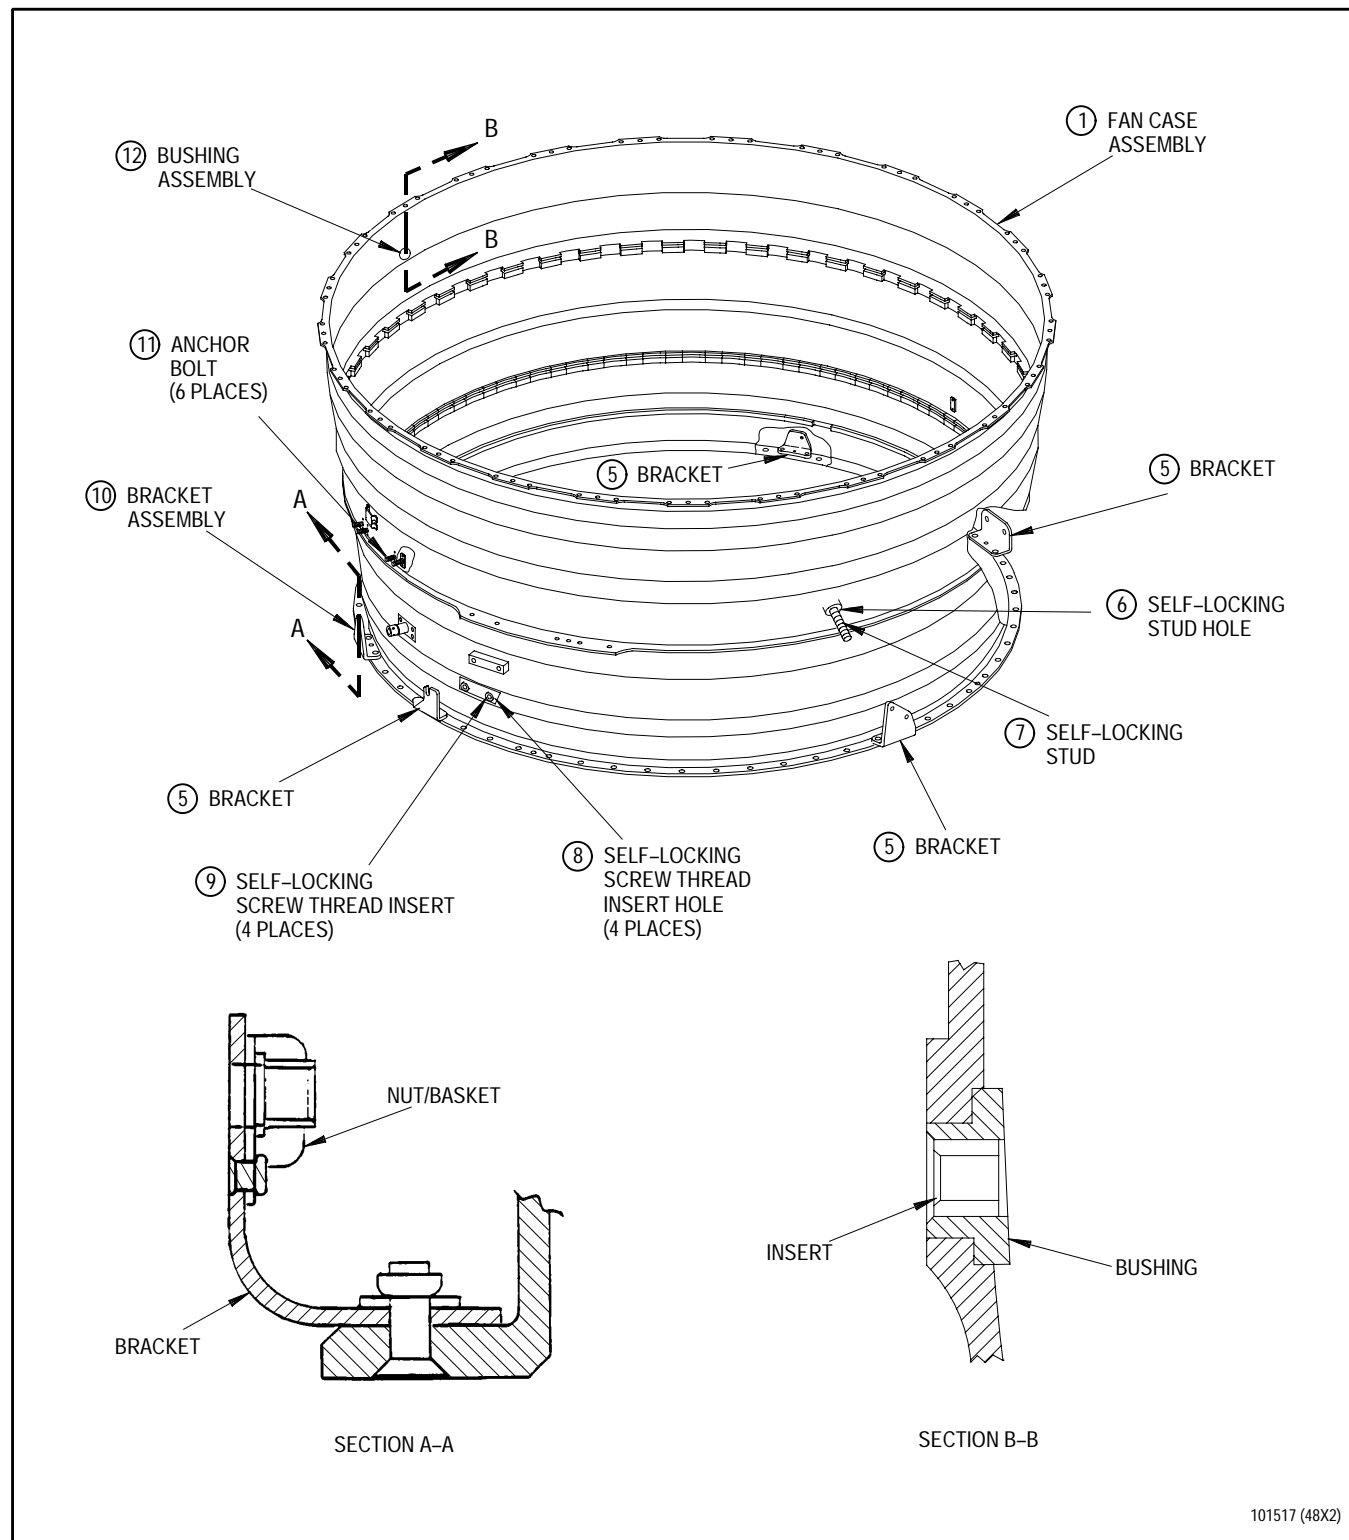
Fan Case Assembly - Inspection (Sheet 1 of 2)
